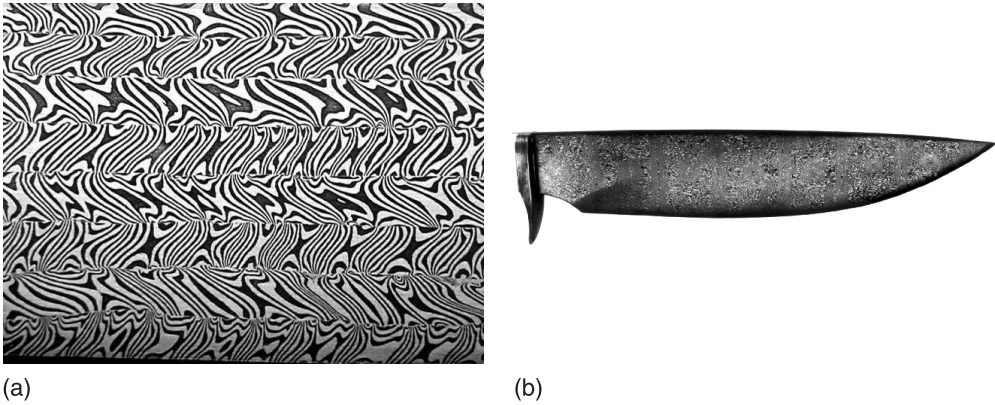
(a) Etched surface of a Damascus blade showing in detail the Damascene surface pattern generated by continued folding and twisting during forge welding of alternating sheets of high- and low-carbon steels. (b) A reconstructed Damascus blade showing the Damascene surface pattern (“Mohammed’s ladders” and “rose patterns”) produced from a single wootz steel ingot (Verhoeven et al. 1998).
